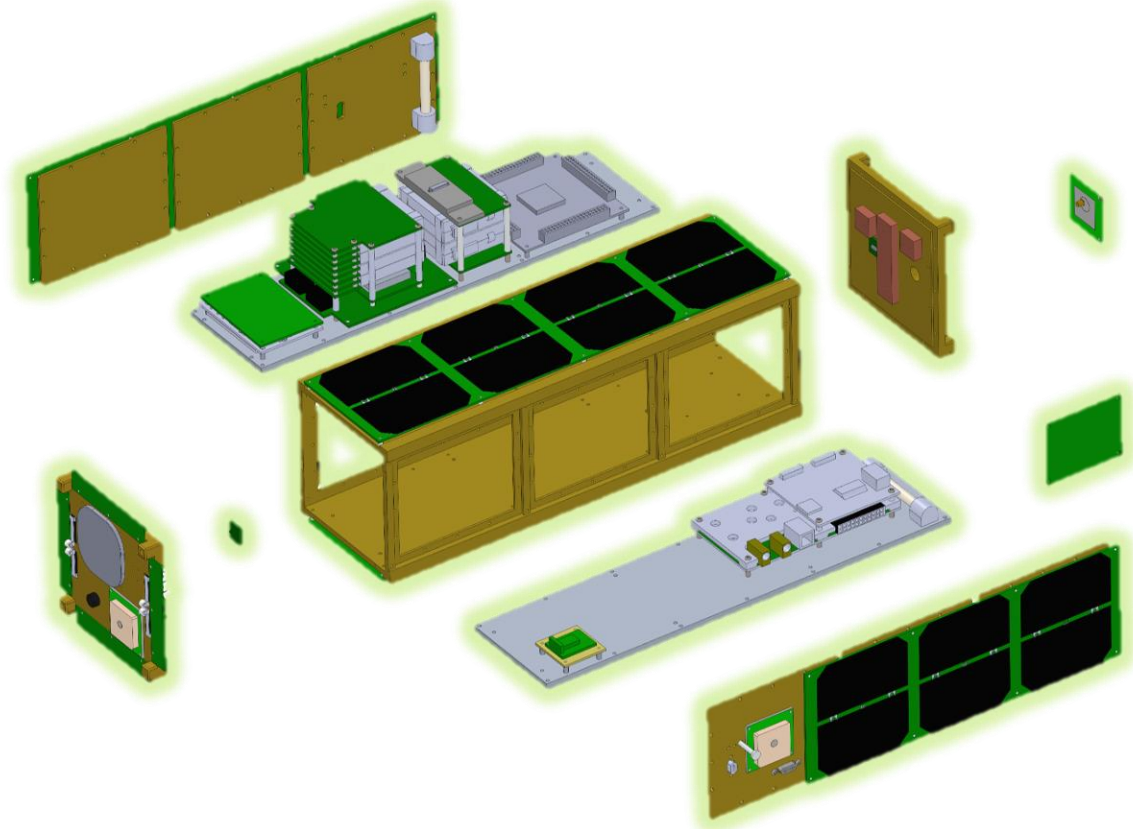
USI’s UNITE team 3U CubeSat Exploded View [2].
